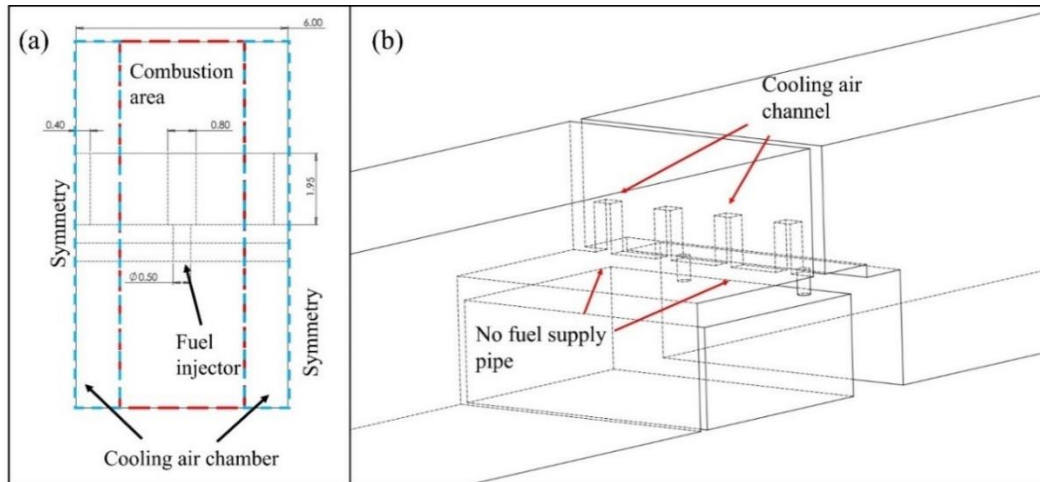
Schematic drawing of side cooling design on multi-injection elements.
